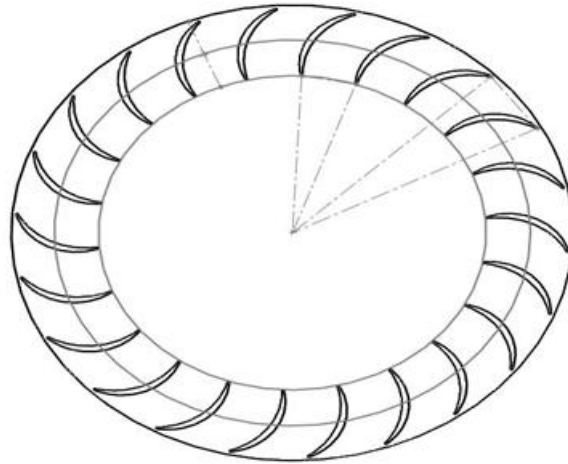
Drawing of 22-Bladed Rotor in SOLIDWORKS
